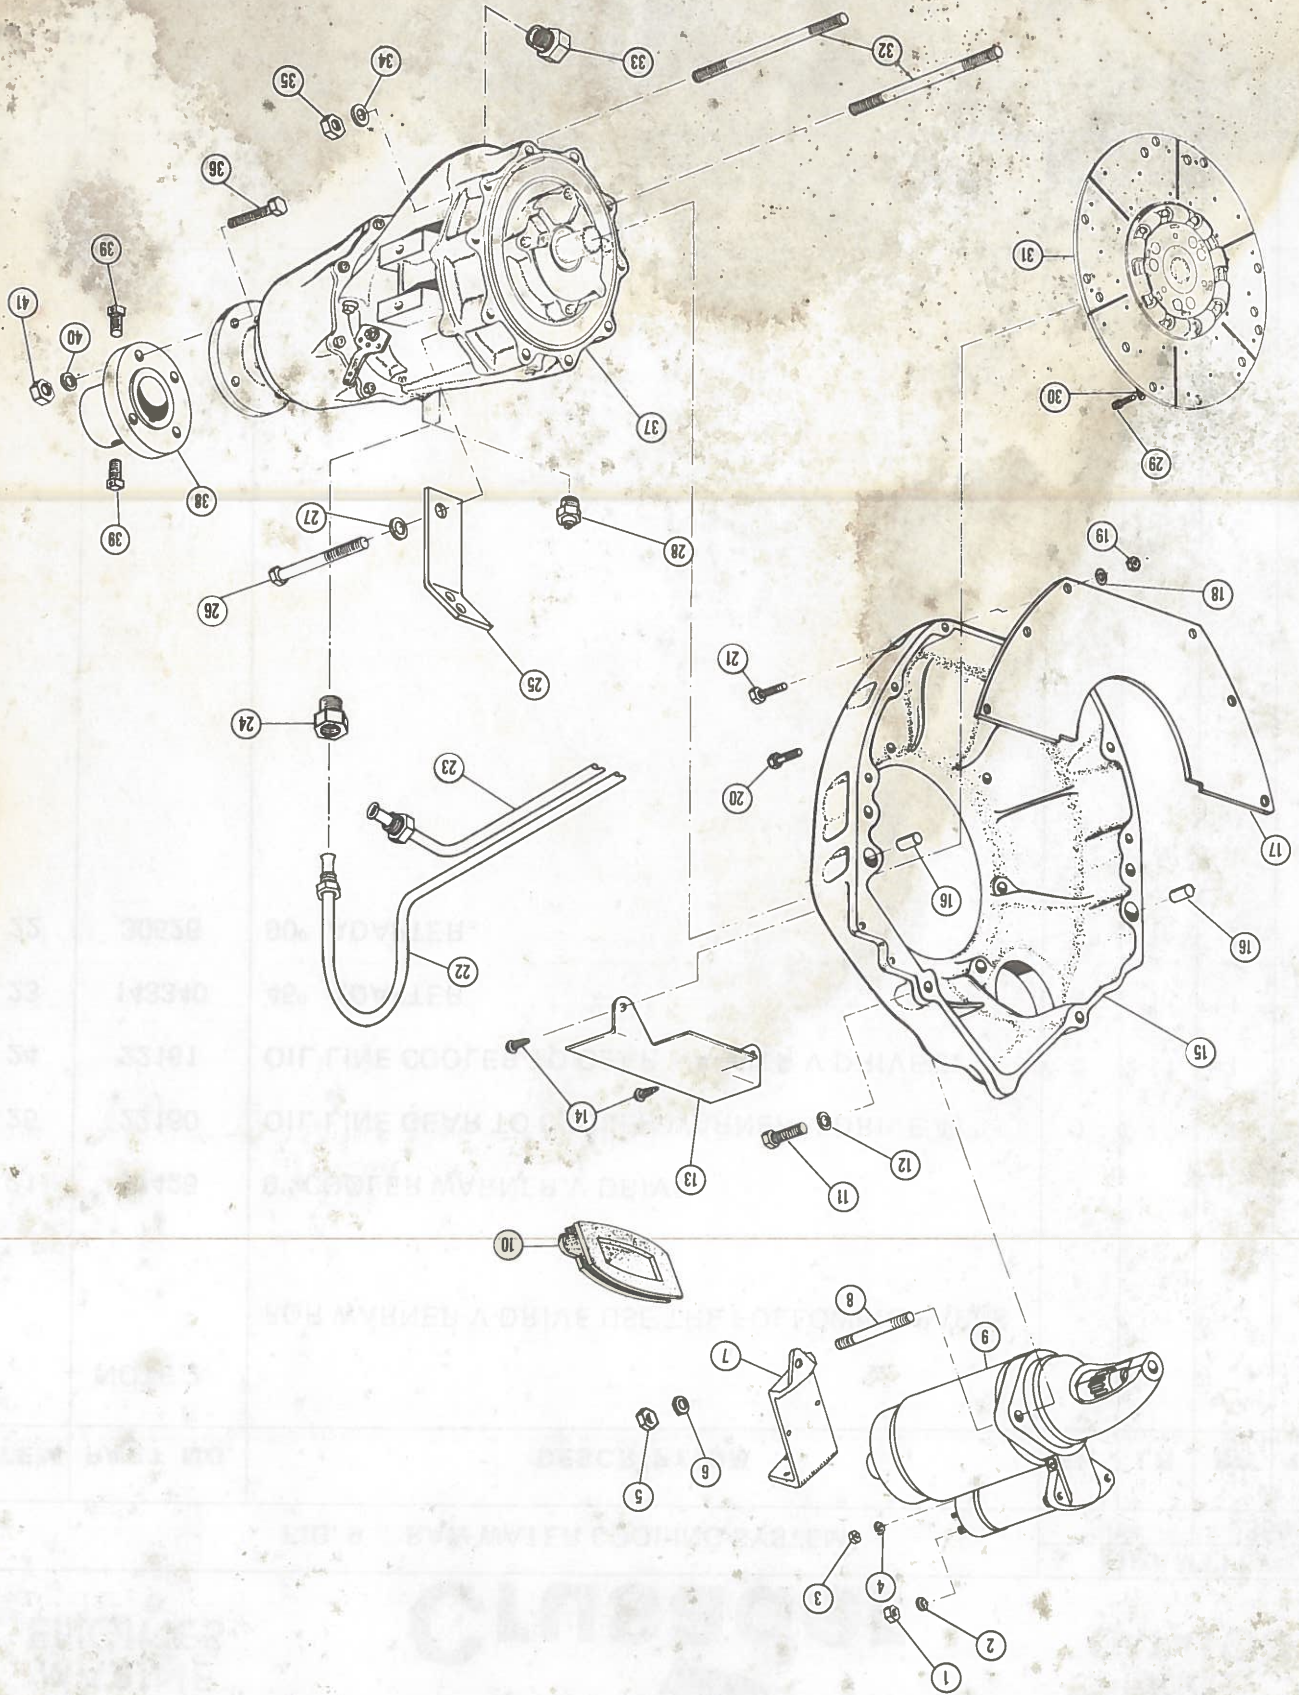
FLYWHEEL HOUSING ASSEMBLY
